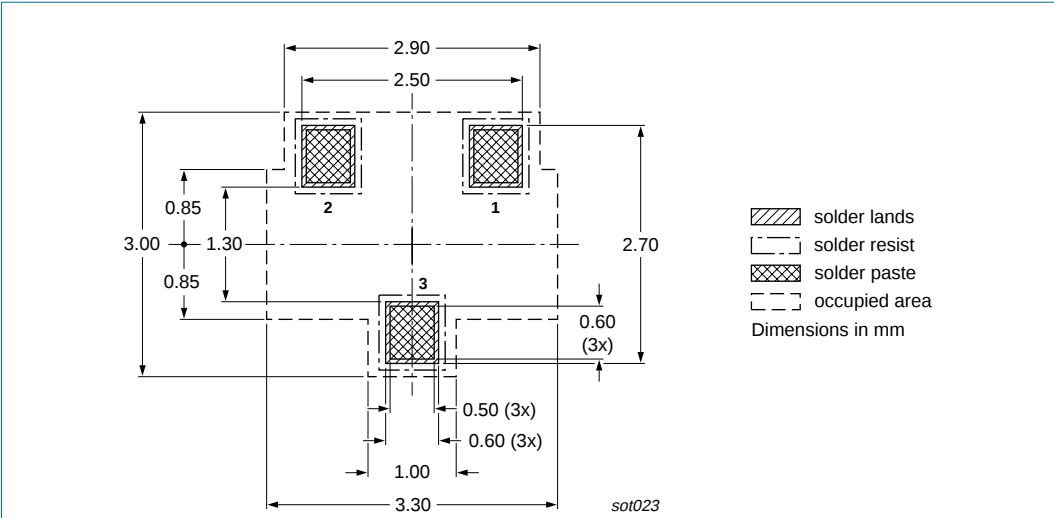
Reflow soldering footprint SOT23 (TO-236AB)
